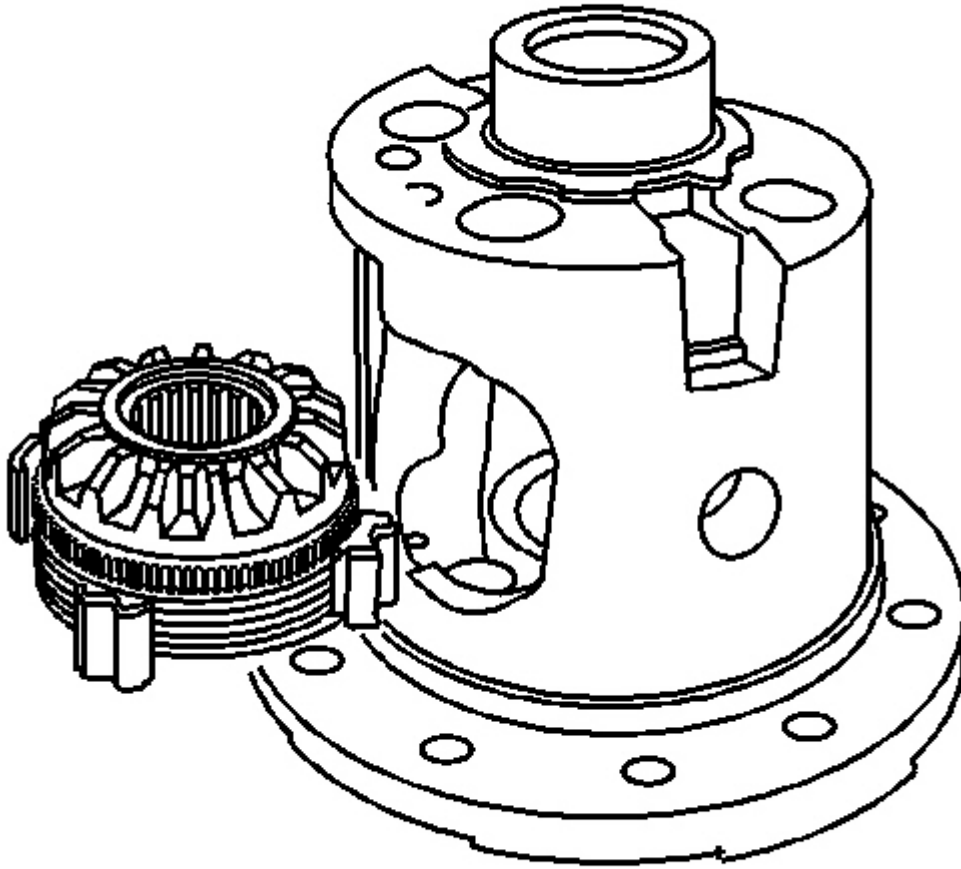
View Of Left Side Gear Cam Unit & Clutch Disc Assembly
